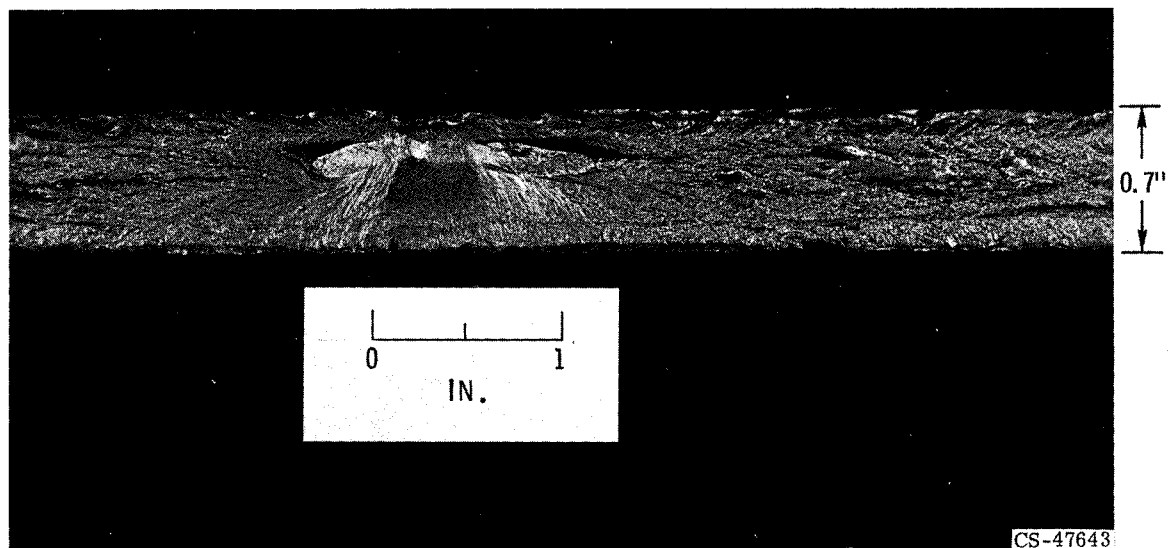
Flaw at which fracture initiated (ref. 2).
